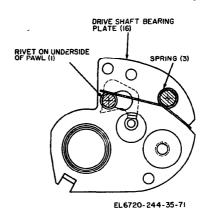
Spring location (spring (3) from fig. 3-14)
